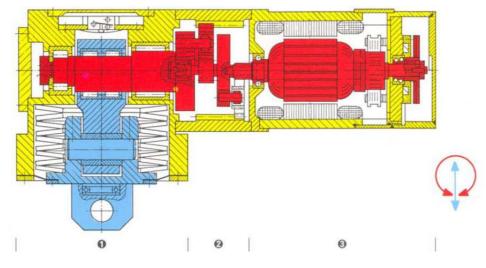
Raco Schwelm GBM III (Raco Schwelm, 1994)
